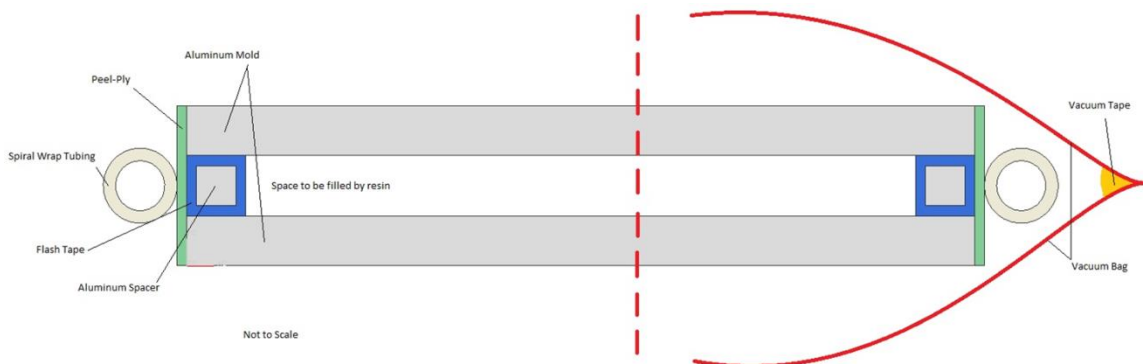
Pure resin mold cross sectional view highlighting use of spacers
